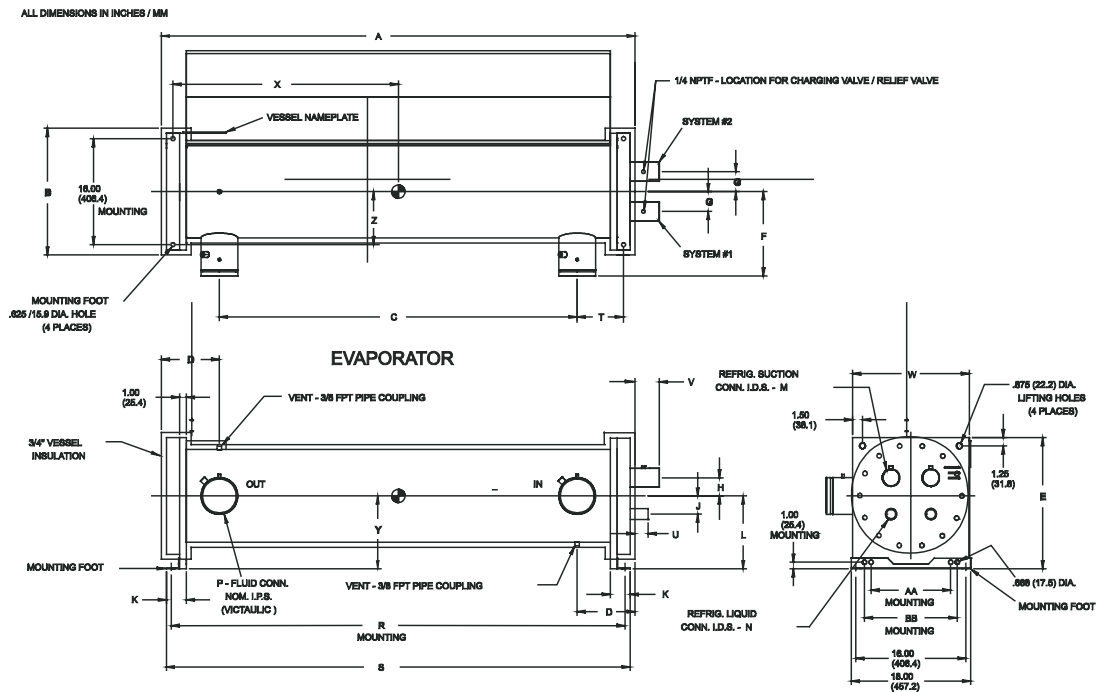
, Dimensions AGZ 035AM - 050AM and ACZ 045A - 055A
